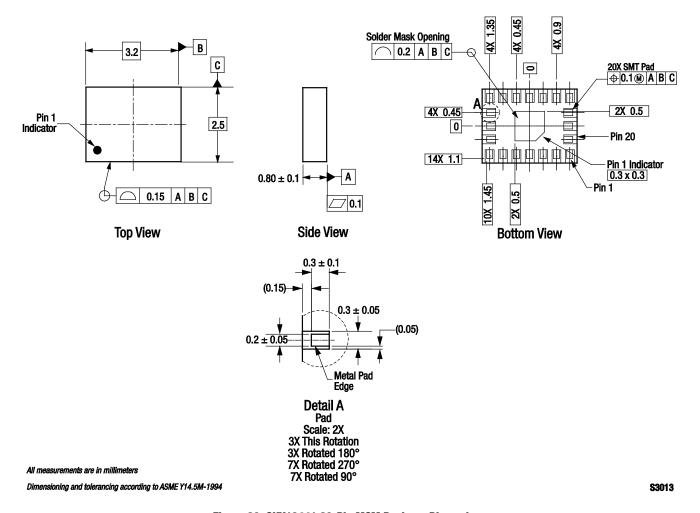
SKY13441 20-Pin MCM Package Dimensions
